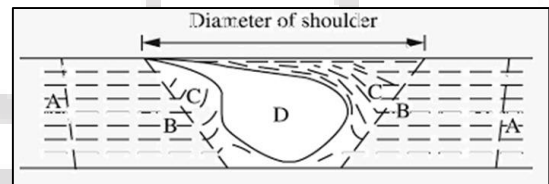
Typical weld cross-sections with four different zones in FSW
